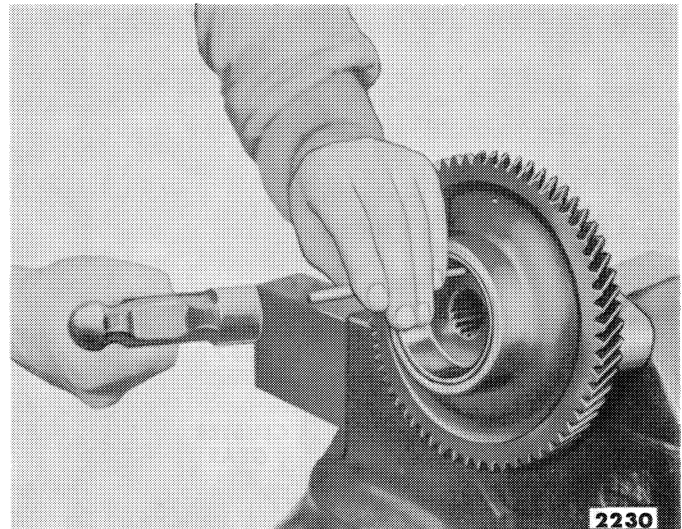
Removing Bearing from P.T.O. Countershaft Gear
